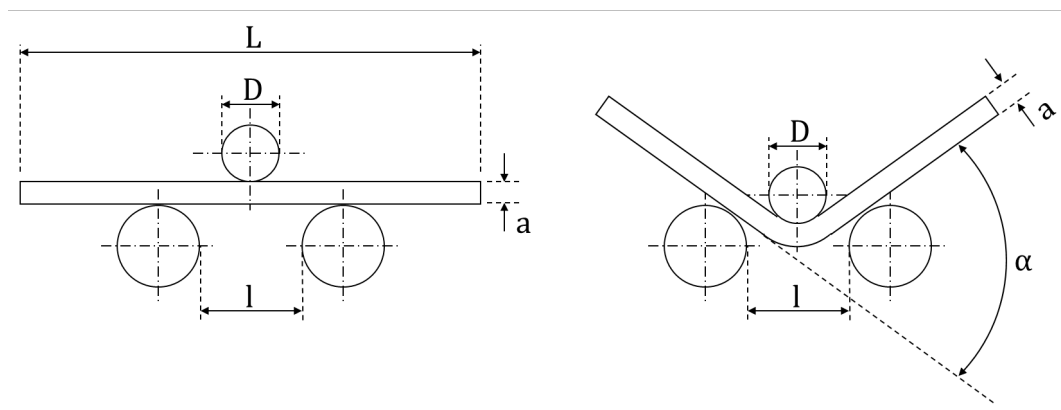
Scheme of the bending device with two support rollers and a bending punch to determine the critical bending radius according to DIN EN ISO 7438:2016-07. The bending punch has a diameter of D.
